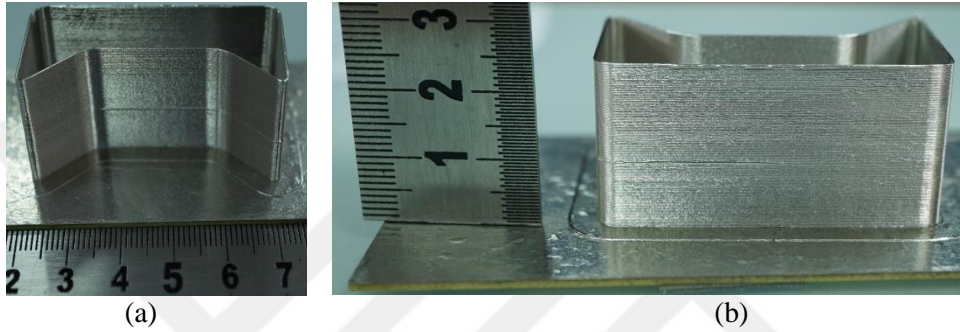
The printed female shell consists of 125 layers; a) front view and b) back view
